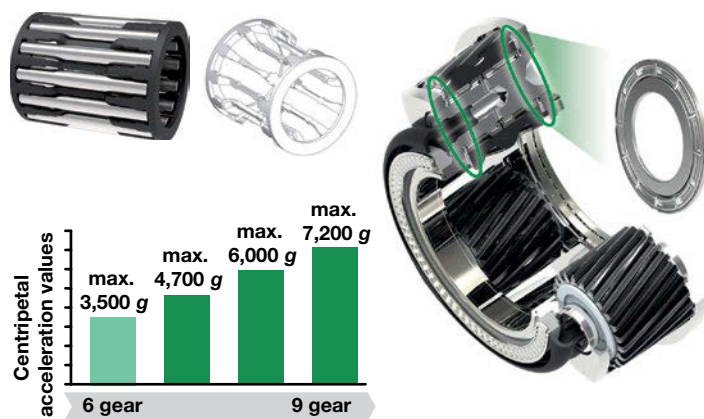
Centripetal acceleration values in the planet gear bearing supports of automatic transmissions and a newly developed axial needle roller bearing support for planet gears with a high relative speed
